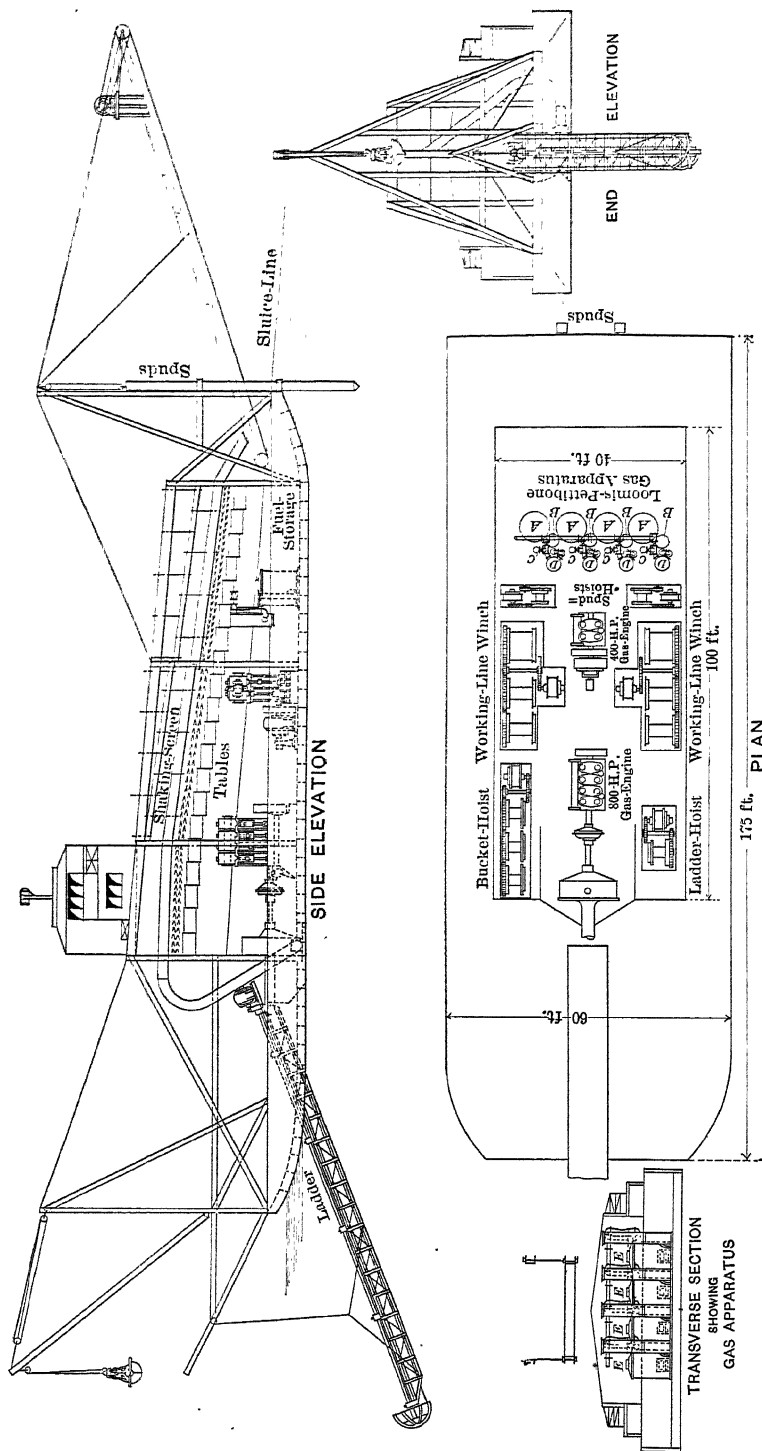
PLAN, ELEVATIONS, AND SECTION OF THE PROPOSED GRANGER DREDGE.
